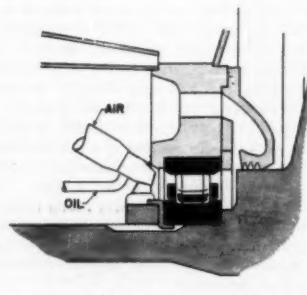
AIRCRAFT GAS-TURBINE BEARING—MIST-LUBRICATED, METERED AT COMMON REGULATOR
